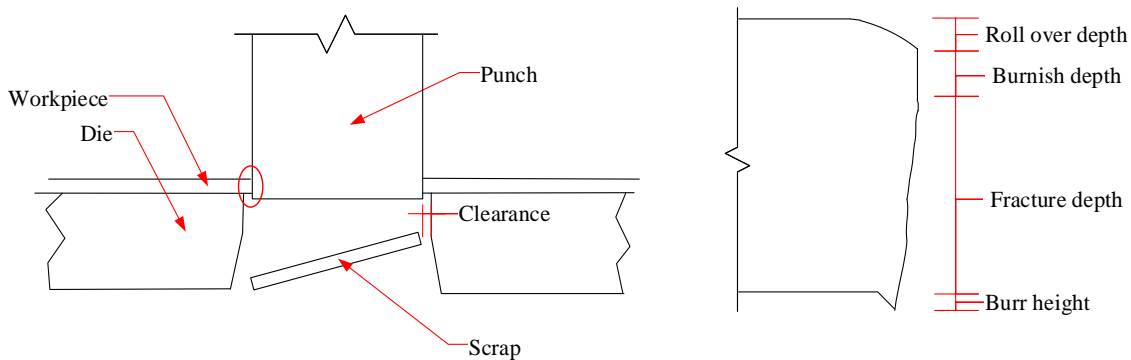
Left: Shearing process consisting of punch and die. Right: Sheared edge showing the formation of burnishing and burr.
